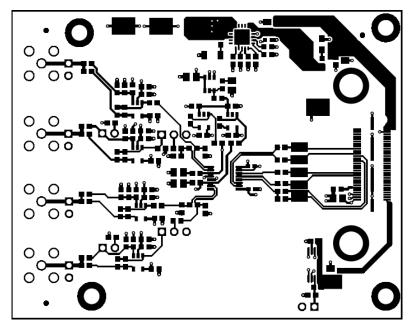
ADS8353-Q1EVM PCB Layer 1: Top Layer
